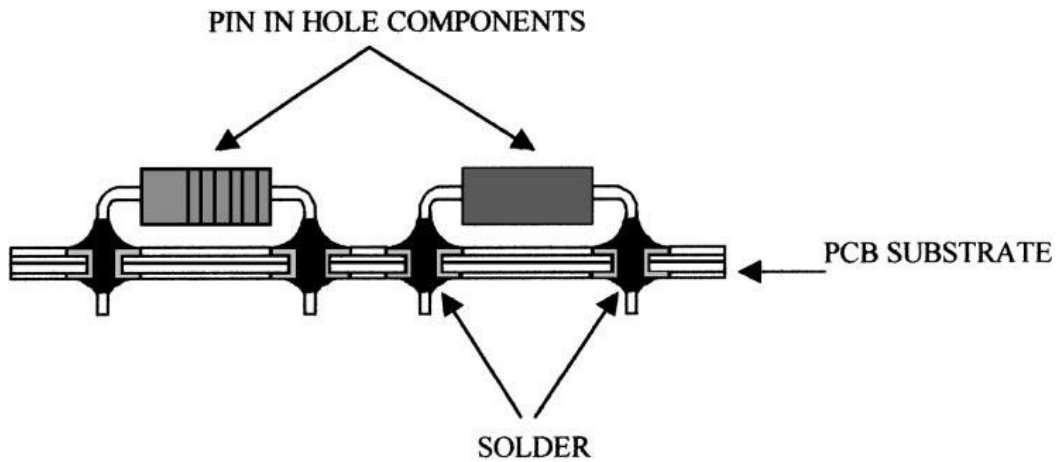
Cross-section of a pin through hole connection of a microelectronics component on a printed wiring board [2].
